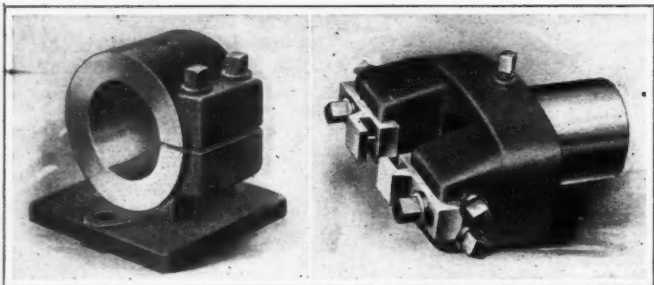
Standard Type of Tool-holder used on Turret Slide of Gridley Automatic Turret Lathe
